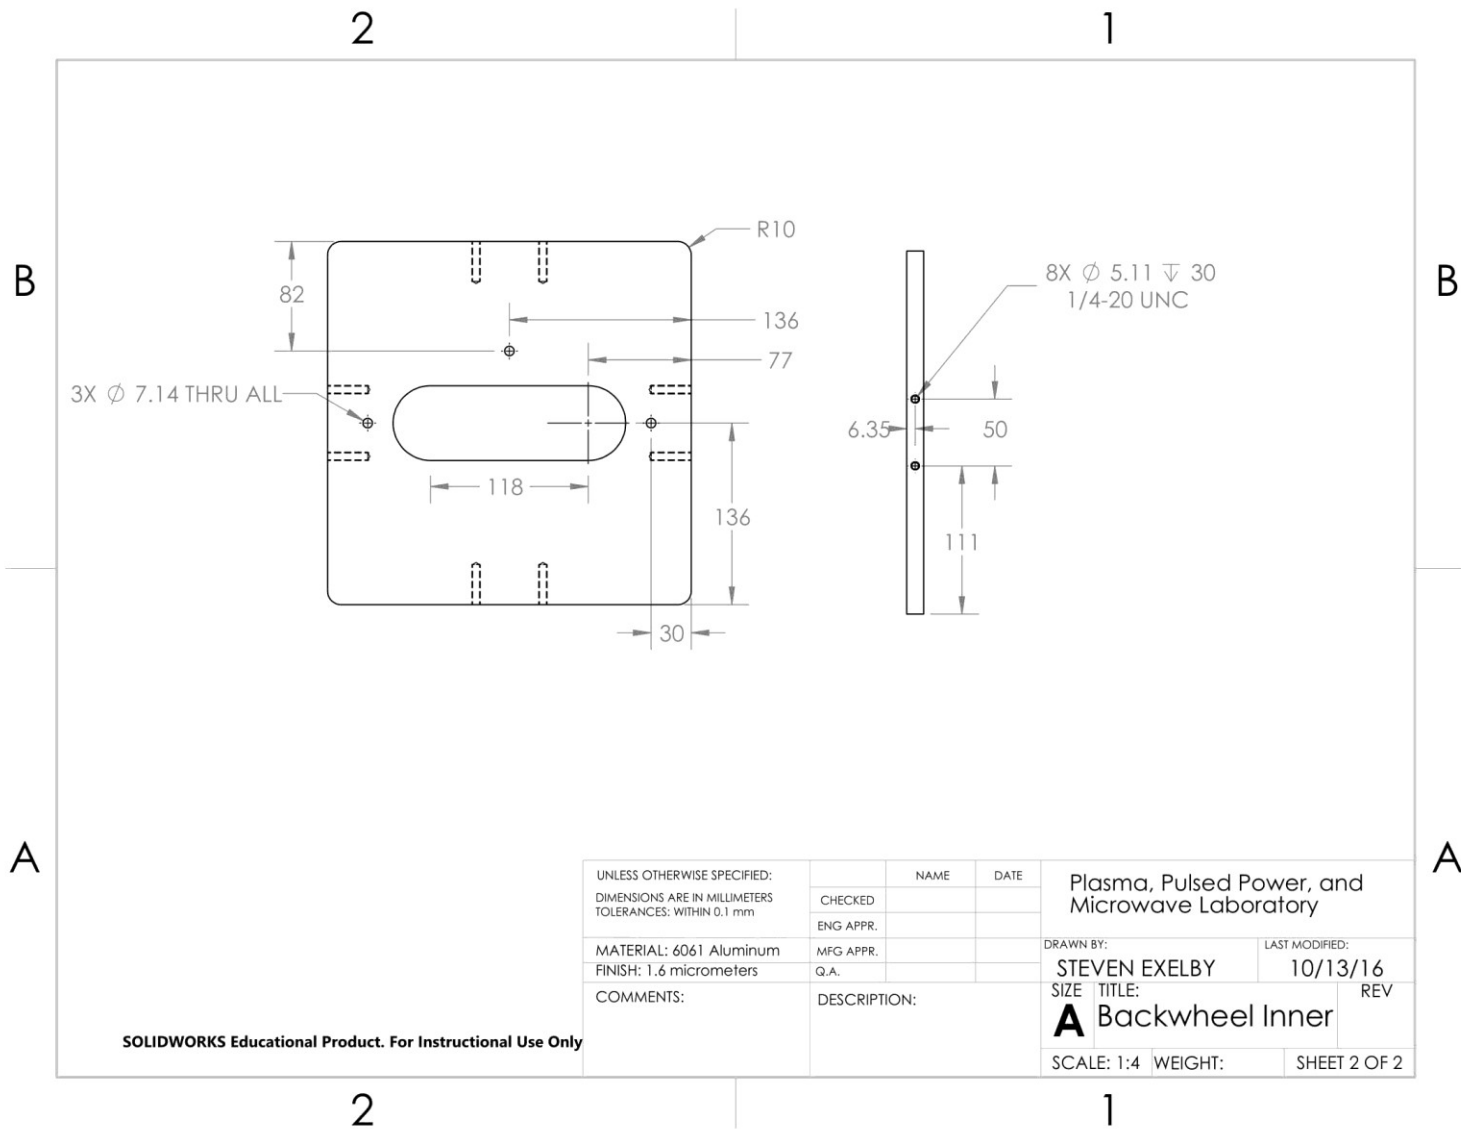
Center piece of the back wheel that locks the inner housing into position, page 2.
